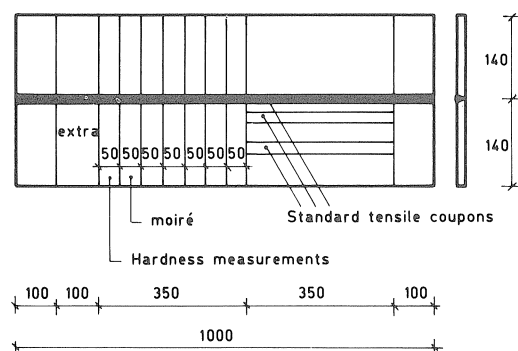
Butt welded joint; dimensions in mm; position of the weld; position and dimensions of different test specimens.
